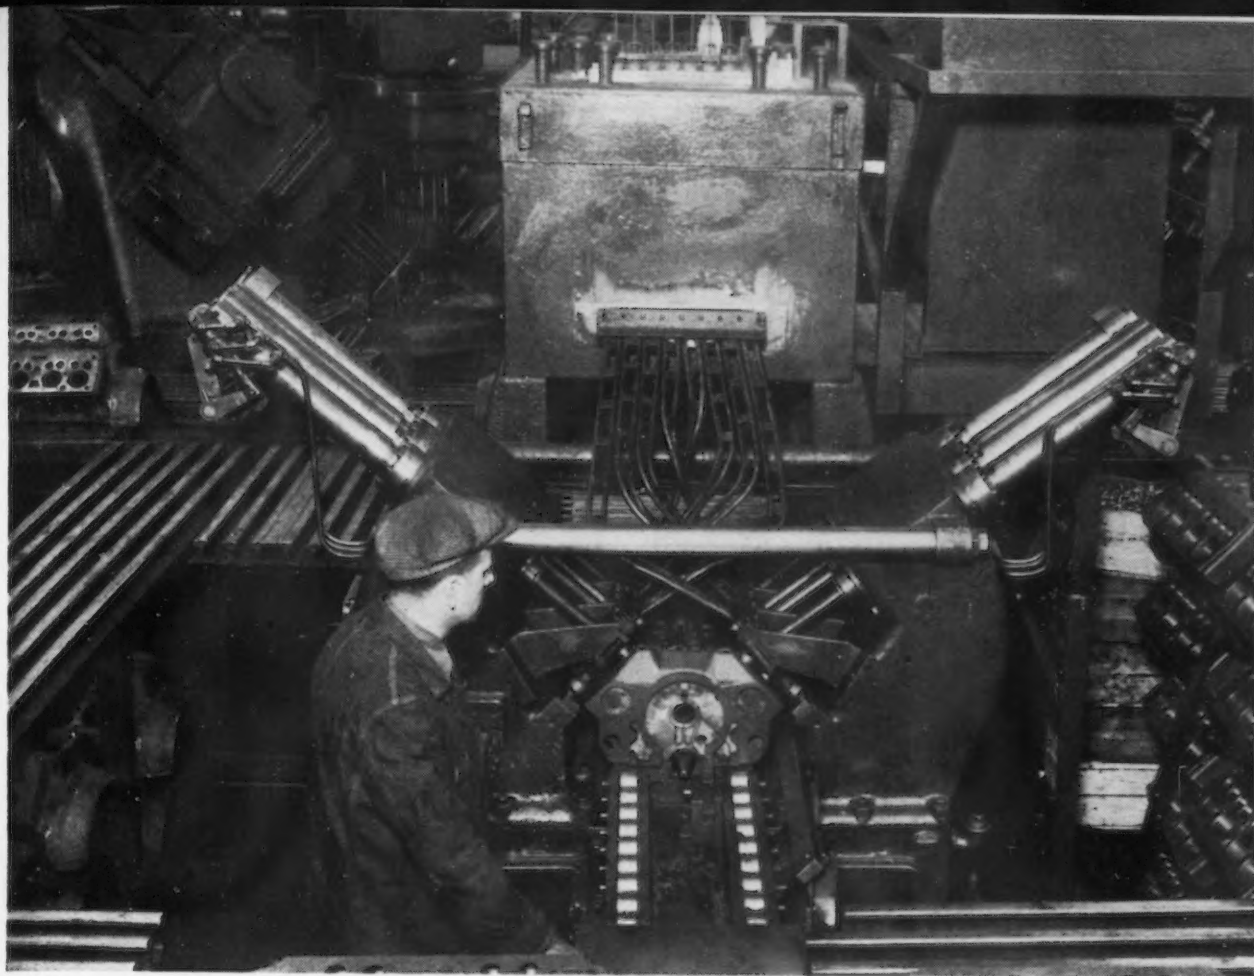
Valve stem and push rod holes are semi-finish reamed in this V-type, fully hydraulic machine, which includes a pull bar that draws the block into the loading position. Reamers are guided by a pilot bar inserted through the camshaft hole as shown. The same bushing bar is also employed in the following set-up in which the valve holes are flycut for alignment in a machine with fixture similar to that shown in Fig. 2.
